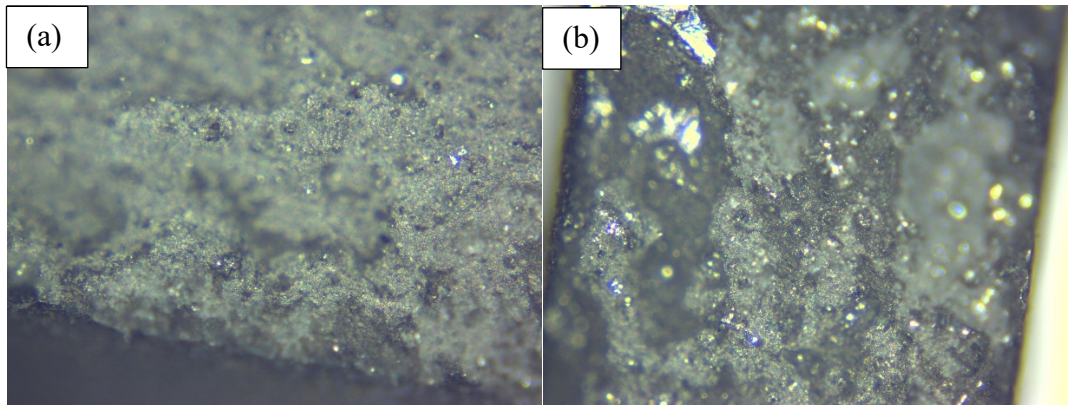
Fracture Surfaces of Additively Manufactured Tensile Samples: (a) horizontally printed (50x), (b) vertically printed (50x)
